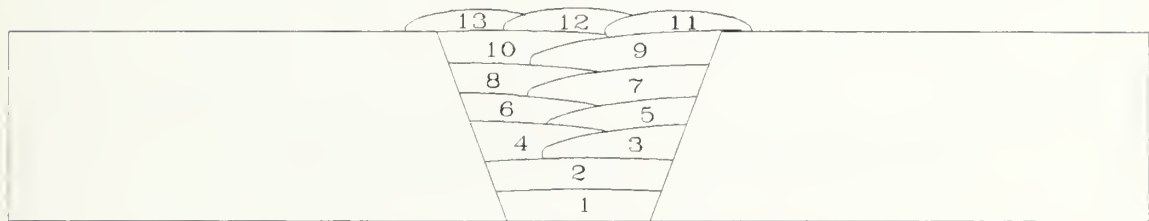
HY-80 Undermatched Specimen Weld Bead Arrangement
